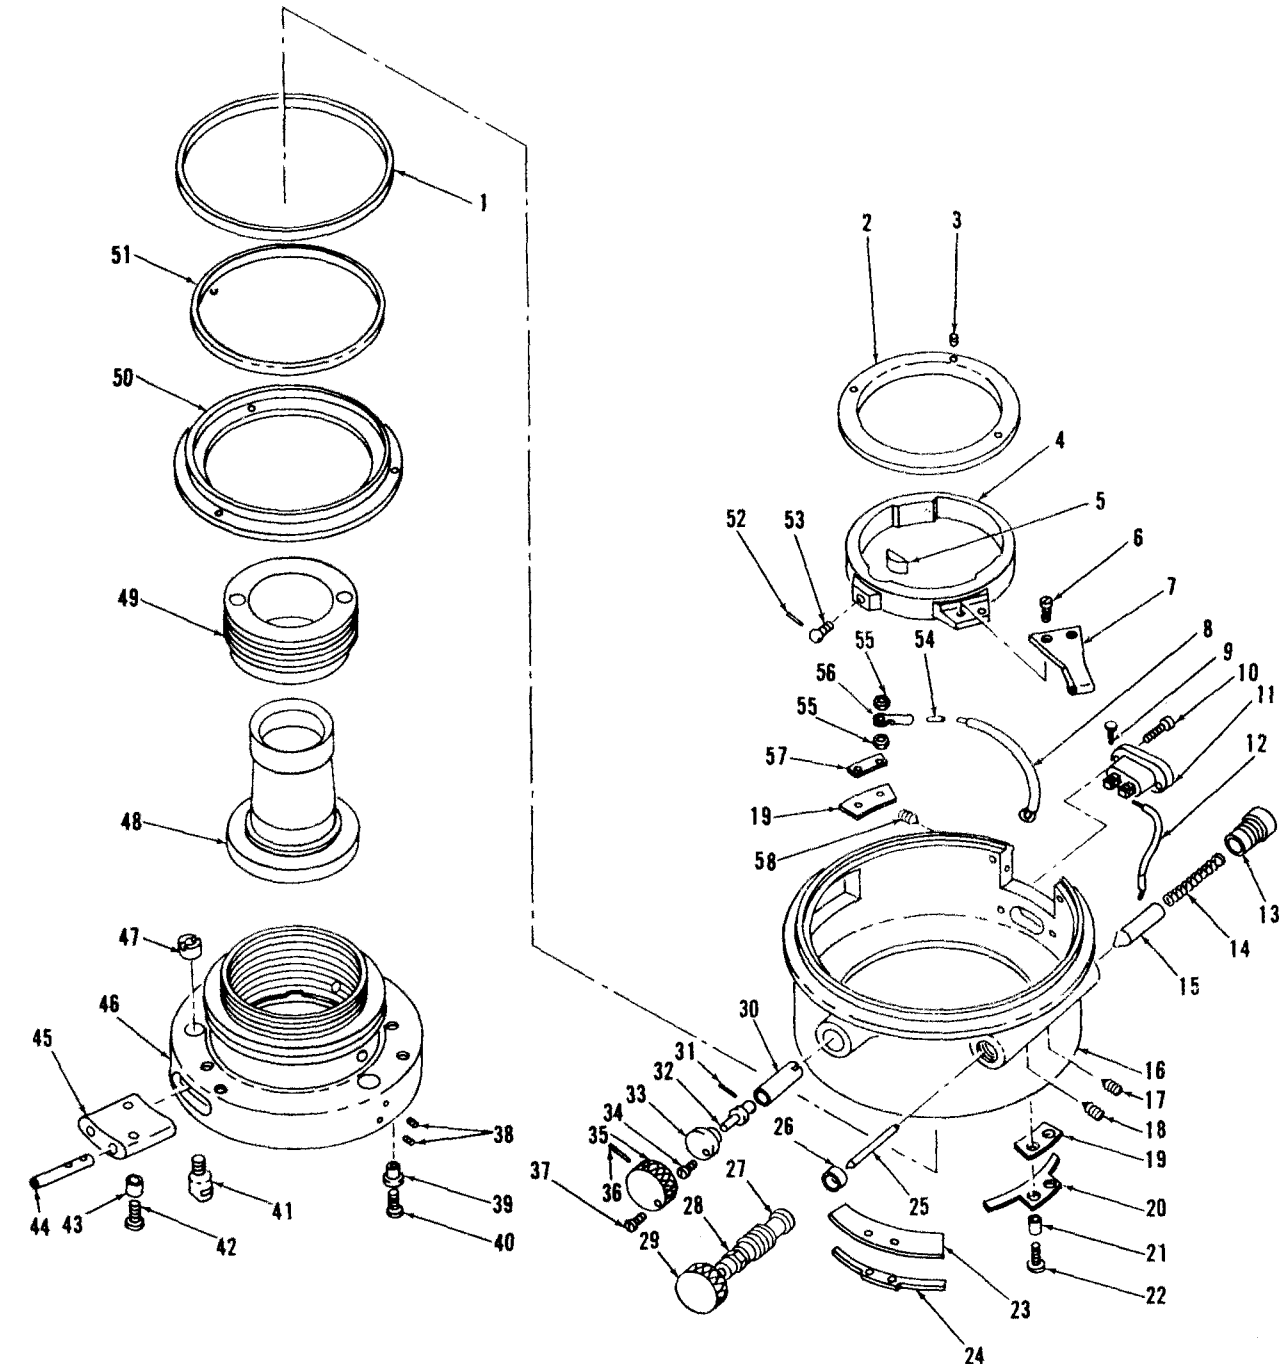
Horizontal circle prism assembly, removal and installation.
